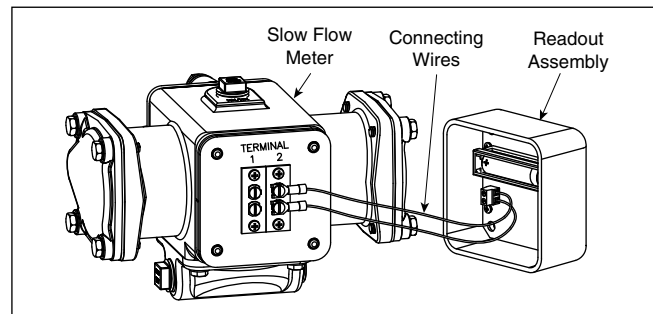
Mounting the Intrinsically Safe Readout to the Meter with Terminals
